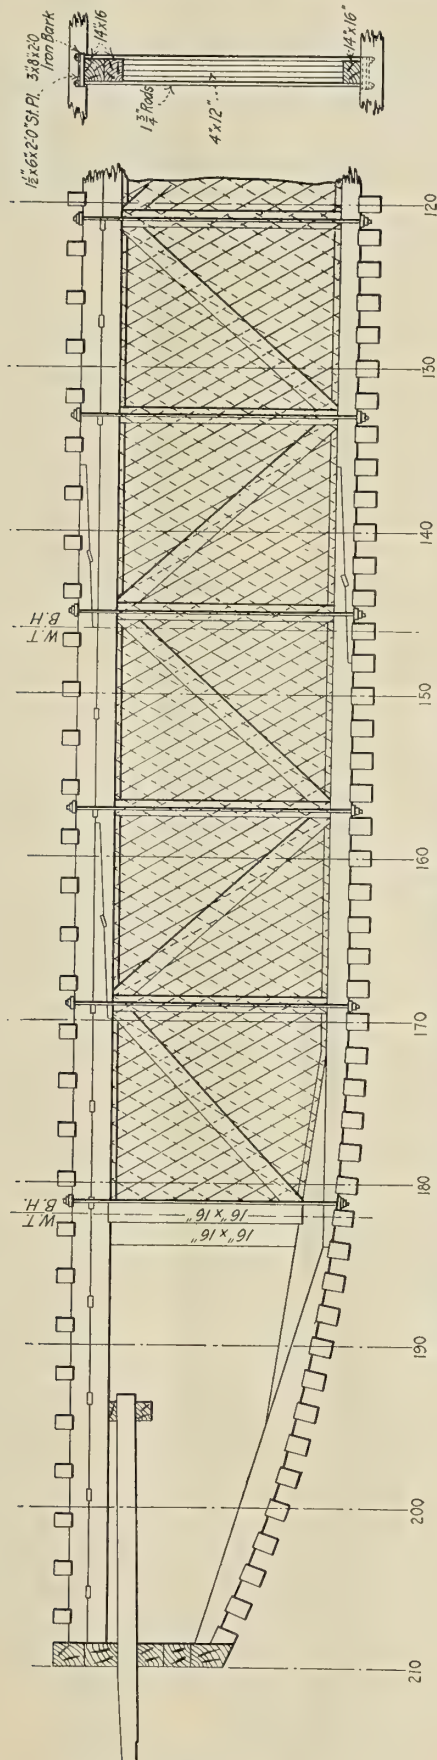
Construction of Longitudinal Bulkheads, Located 6 Feet and 18 Feet, Respectively, from Centerline of Ship
